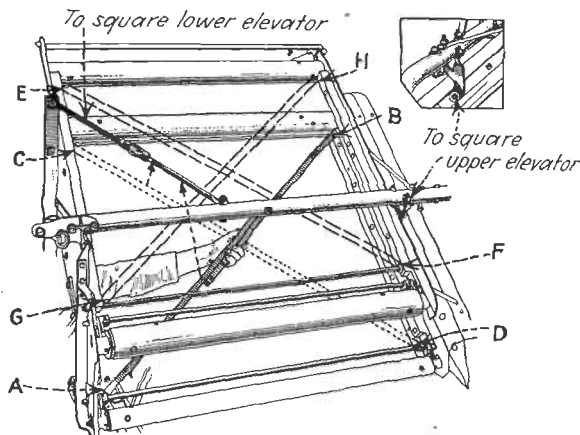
Method of testing and squaring up both the lower and upper elevators.
